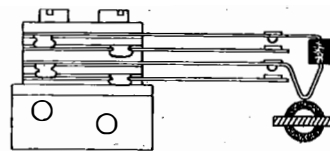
OFF-NORMAL SPRING ASSEMBLY.
